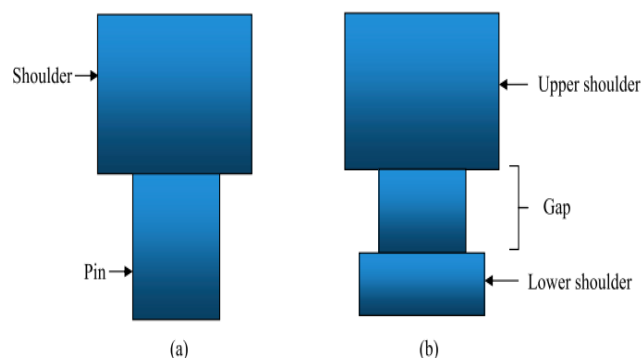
Schematic of tool used in (a) conventional and (b) bobbin tool FSW.
